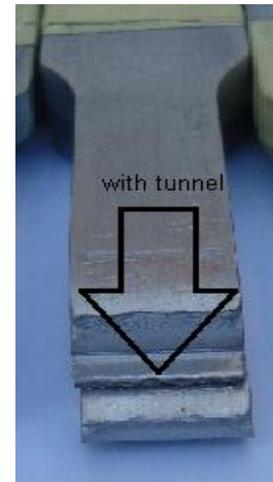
Bending test results for AA6061-T651 aluminum alloy FSW
